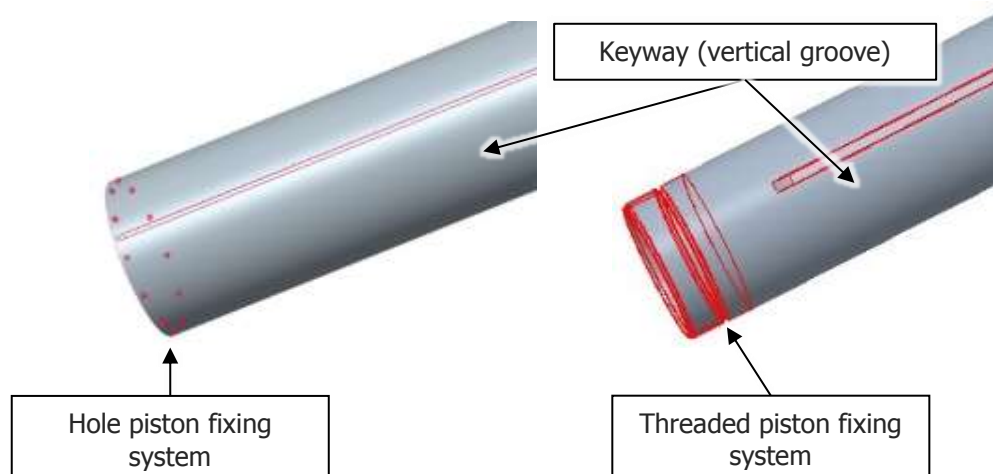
Grooves on mobile tubes – lower part of a mobile tube with fixing holes (left) or threads (right)
